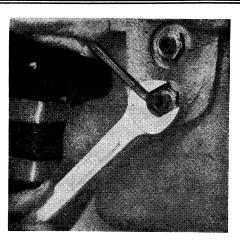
Adjusting Allen set screws in top of carrier housing to allow shift collar to engage splined teeth on spur pinions
